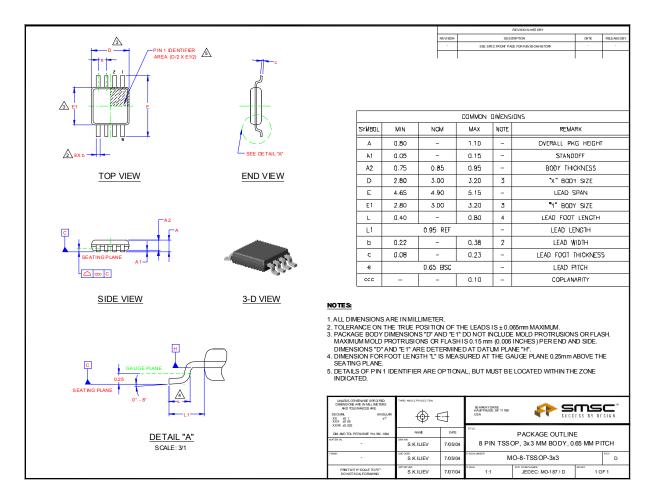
EMC2301 Package Drawing - 8-Pin MSOP
